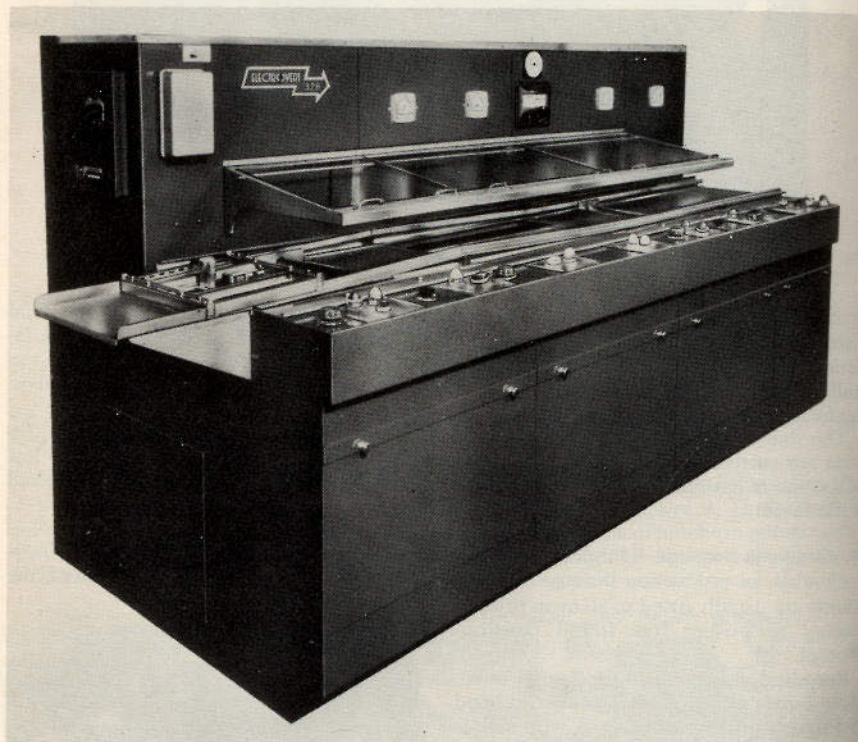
Soldering-machine console. (Courtesy Electrovert, Inc.)
